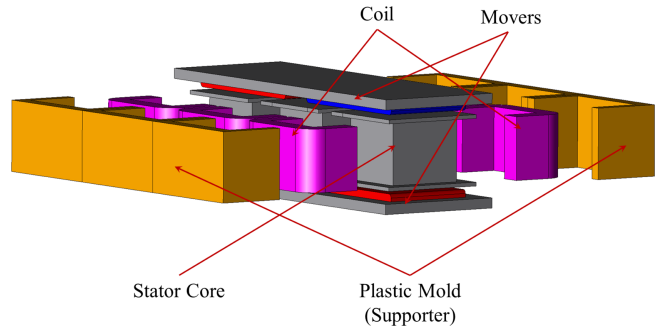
(Color online) Explode view of yoke-less type LPMSM.
